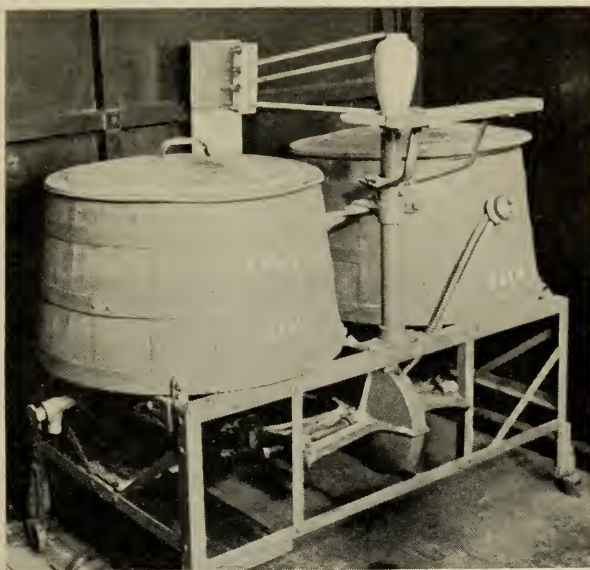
Motor-driven potter's wheel made from discarded washing machine. Note gauge sticks.
